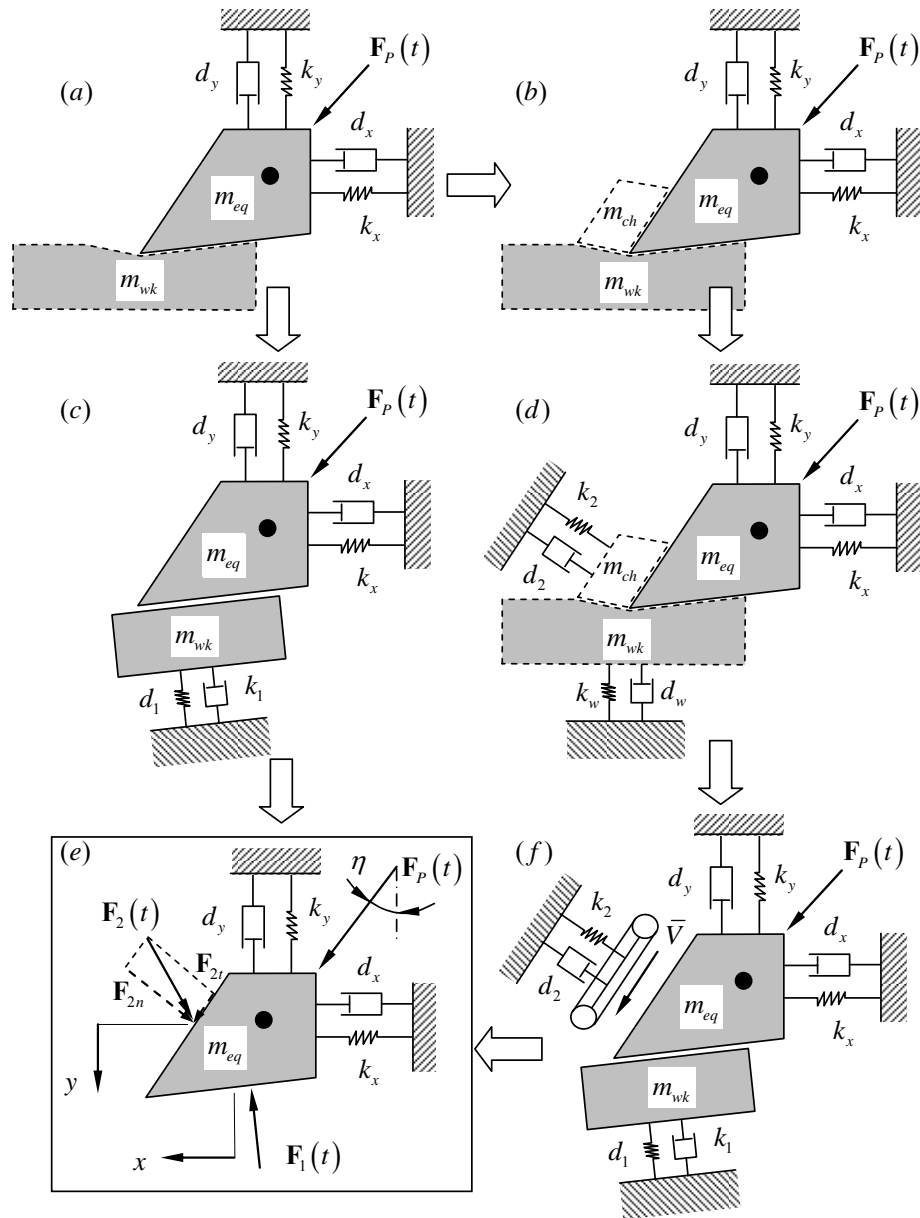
Cutting tool mechanical model: (a) tool and work-pieces in contact (no cutting), (b) tool-piece, work-piece and chip in contact (cutting), (c) tool-piece and work-piece equivalent forces, (d) tool-piece, work-piece and chip dynamic system, (e) equivalent machine-tool analogy, (f) tool-piece, equivalent work-piece and chip dynamics with frictional surface.
